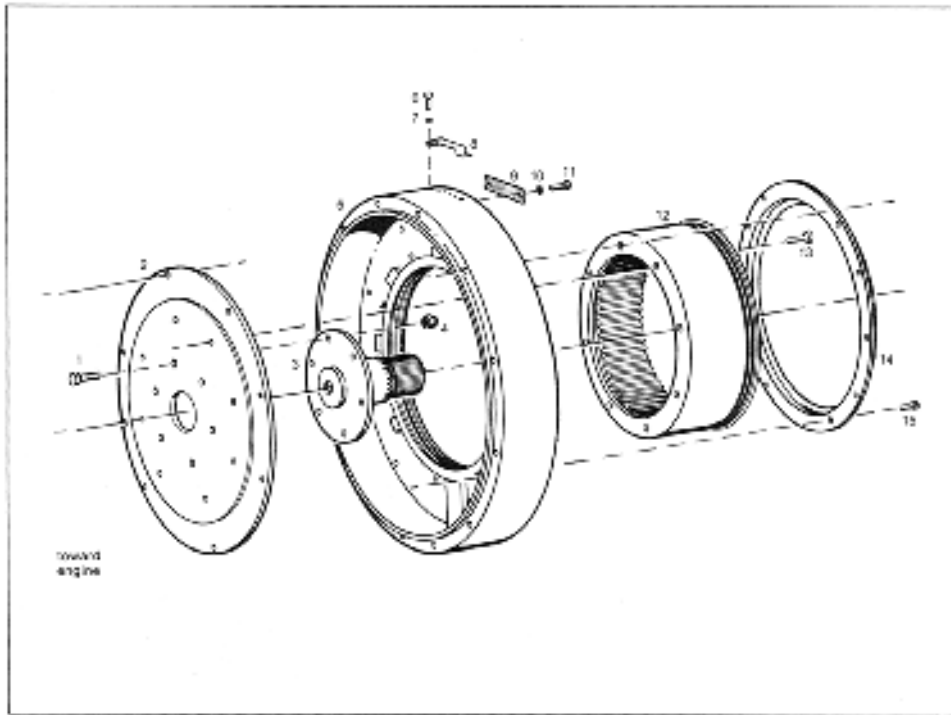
HP-9400 and HP-10500 Adapter Parts
